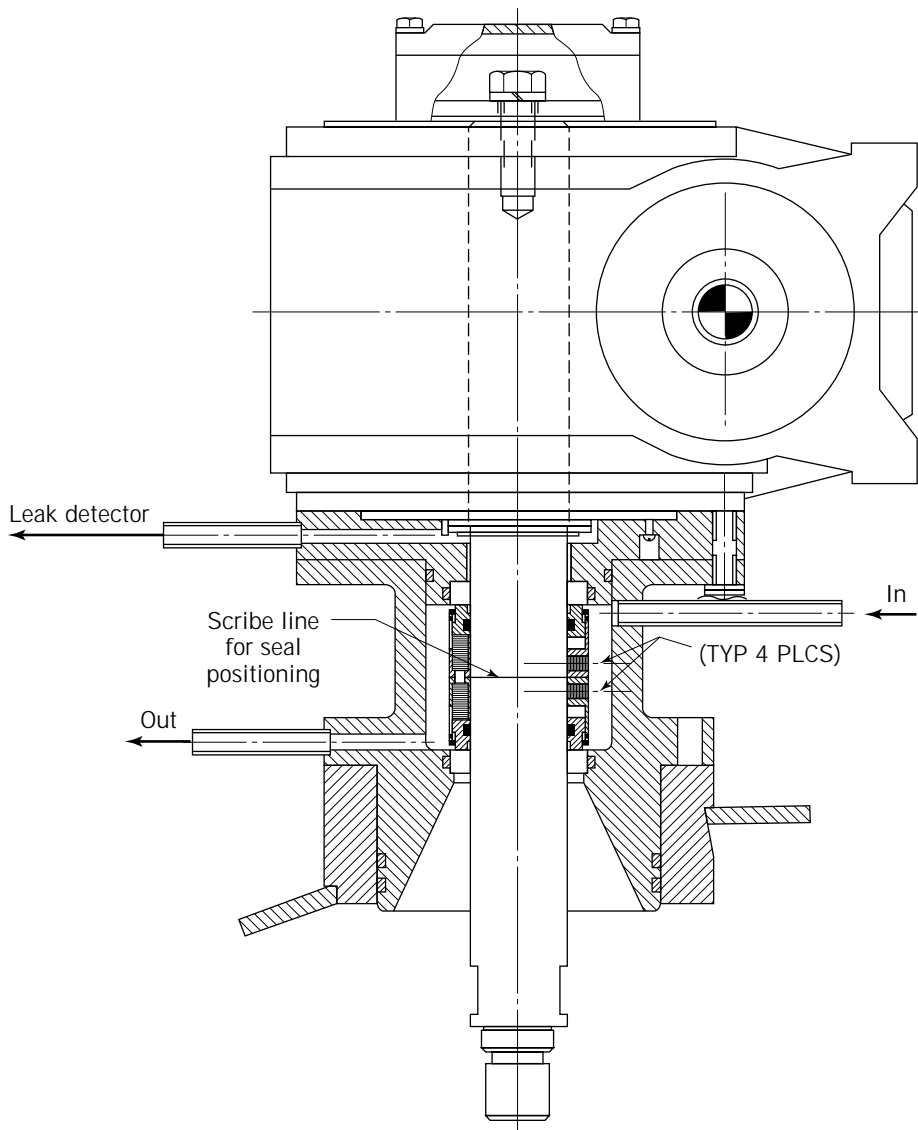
Back-to-back double mechanical fermenter shaft seal.
